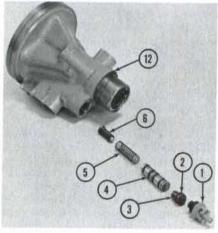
Exploded view of Hydramotor housing and blocking valve components. Blocking valve can be removed without disassembly of Hydramotor.
